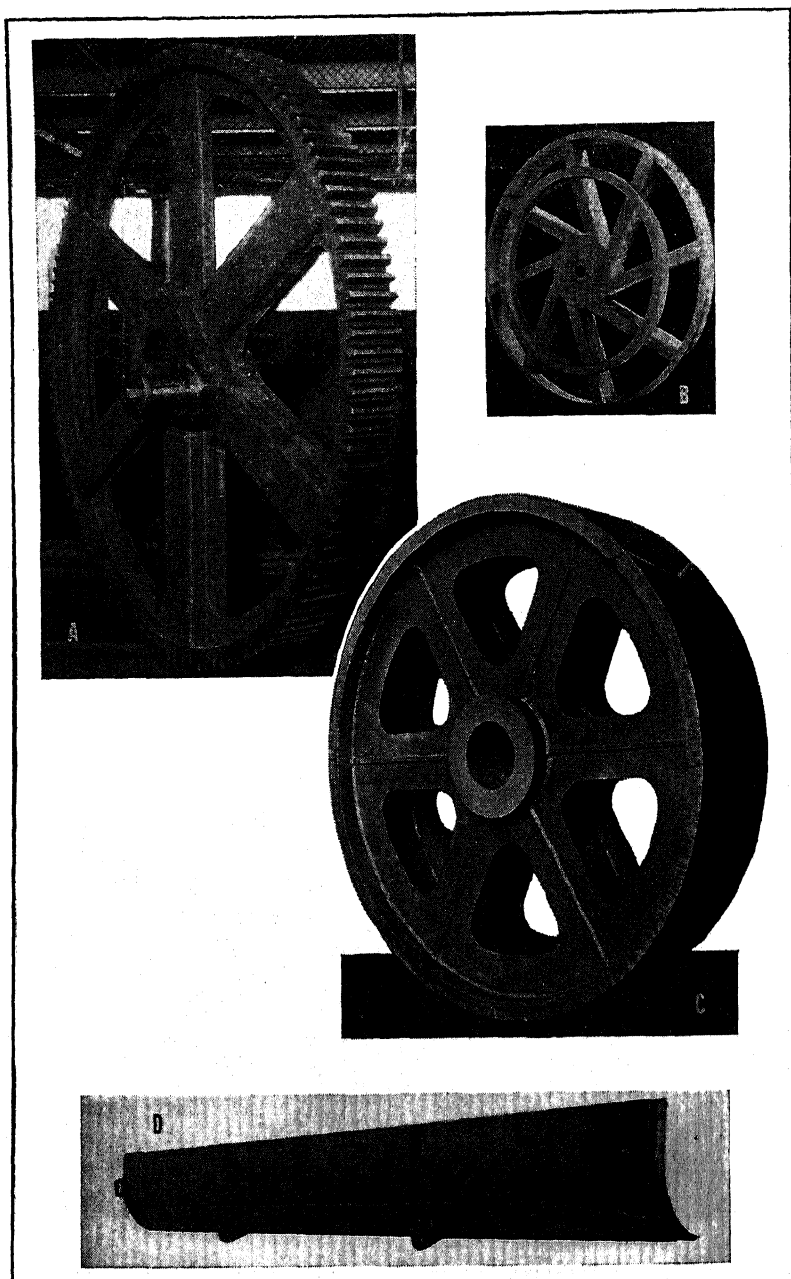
MISC. PARTS—(A) 12-ft. fabricated steel gear. (B) Band-wheel and tug rim. (C) 5-ton gear blank. (D) Mold board for road grader.
